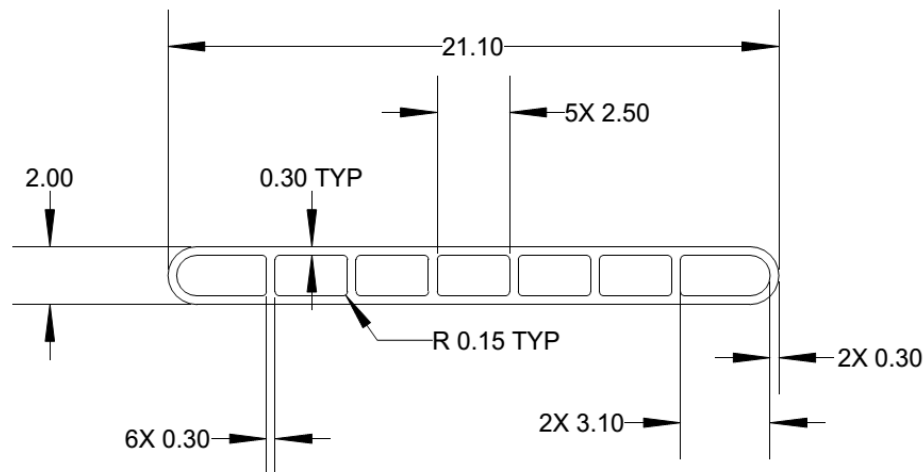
Copper Minichannel Tube Design #1 (Millimeters)
